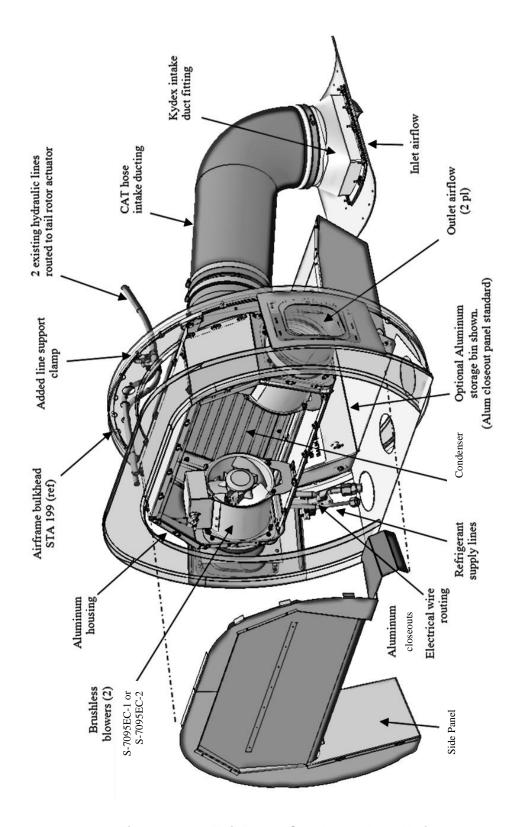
Tail Boom Condenser Installation (Tail Boom – View Looking Aft, Covers Removed to Reveal Details)
